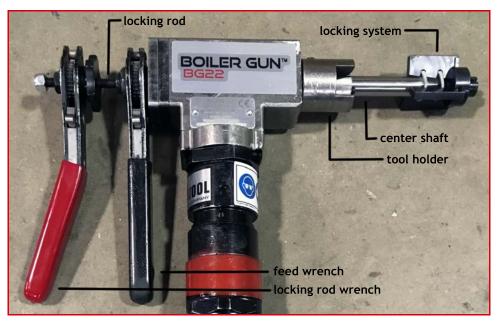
BG22 BOILER GUN MAIN COMPONENTS
